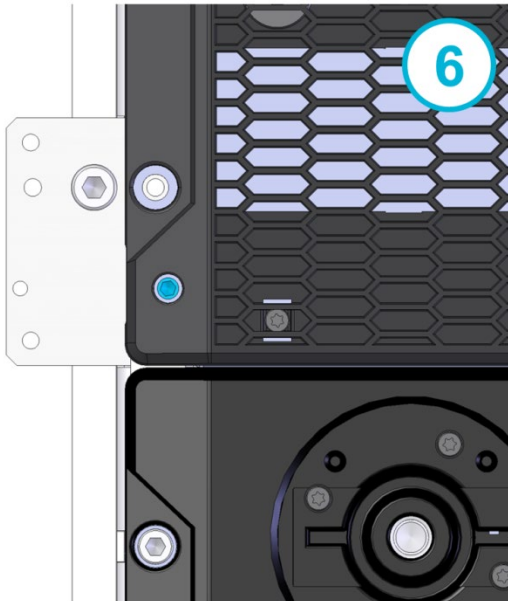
REMOVING THE REMOVAL AID SCREWS
